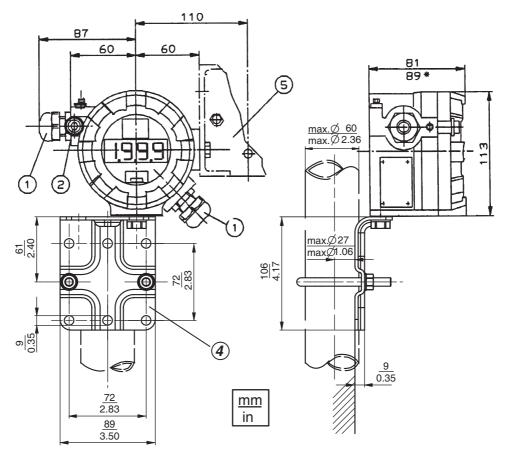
Dimensions with mounting bracket for pipe and wall mounting
